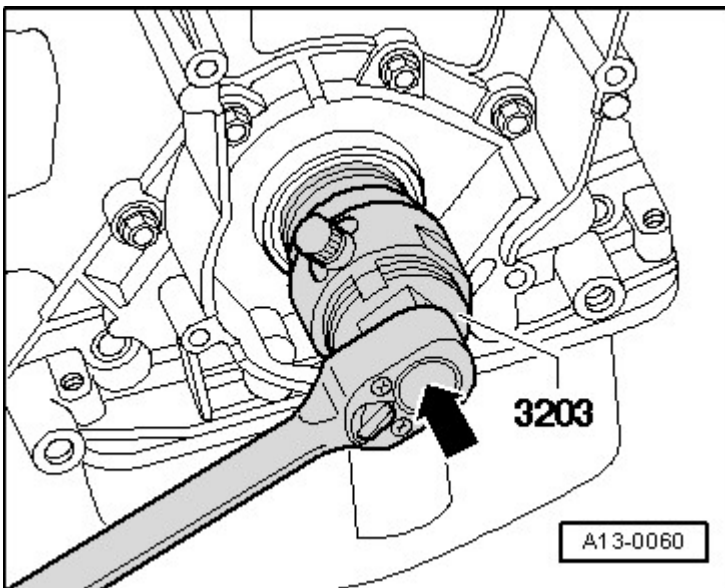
Exerting Firm Pressure To Oil Seal Extractor 3203 Into Oil Seal
